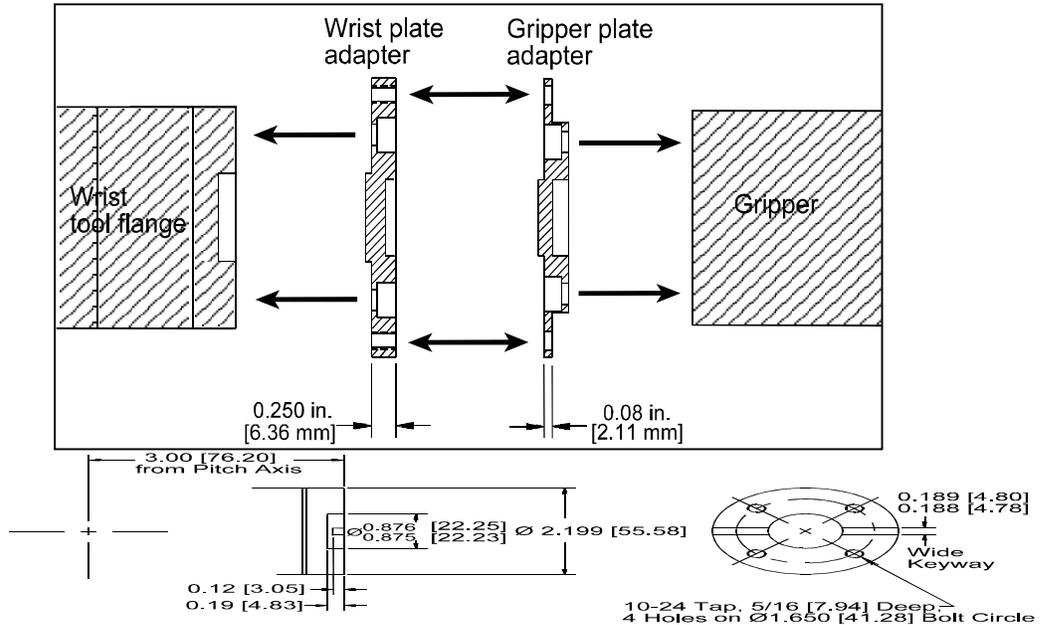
Mounting dimensions of the tool flange for the gripper in inches [mm].
